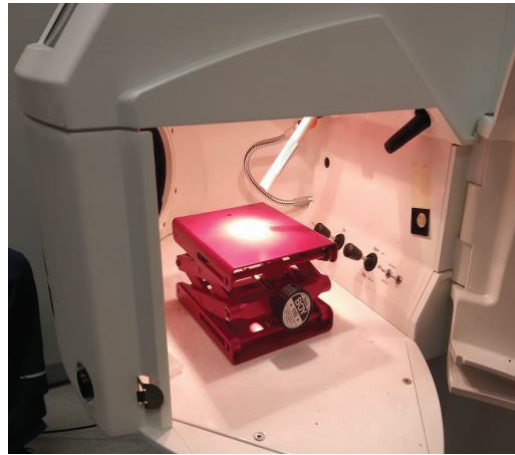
The photograph showing inside view of the laser welding facility located in the University of Hamburg workshop located on the DESY campus
